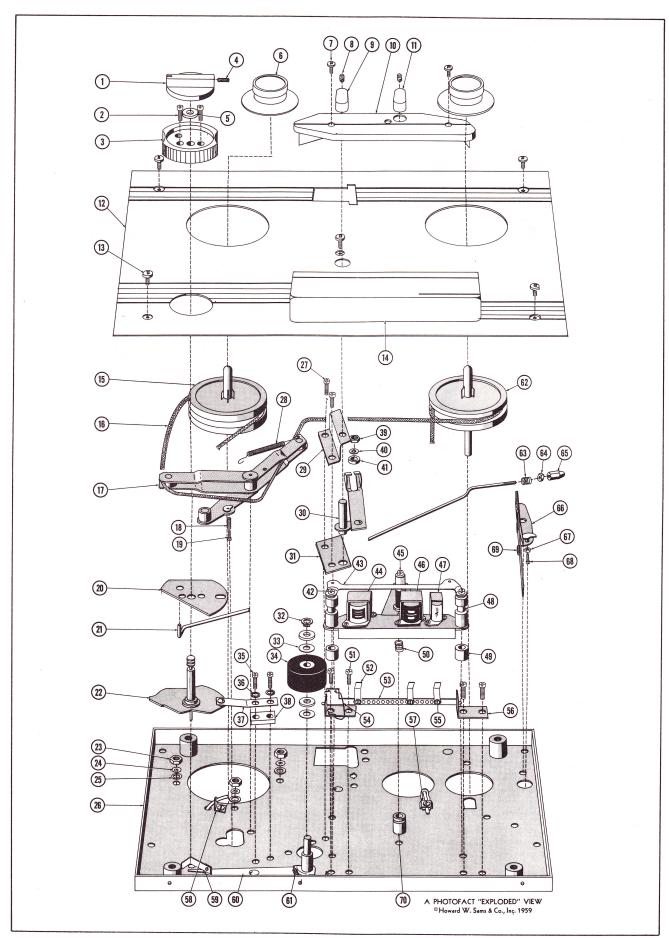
A. EXPLODED VIEW OF PARTS ABOVE BASEPLATE
